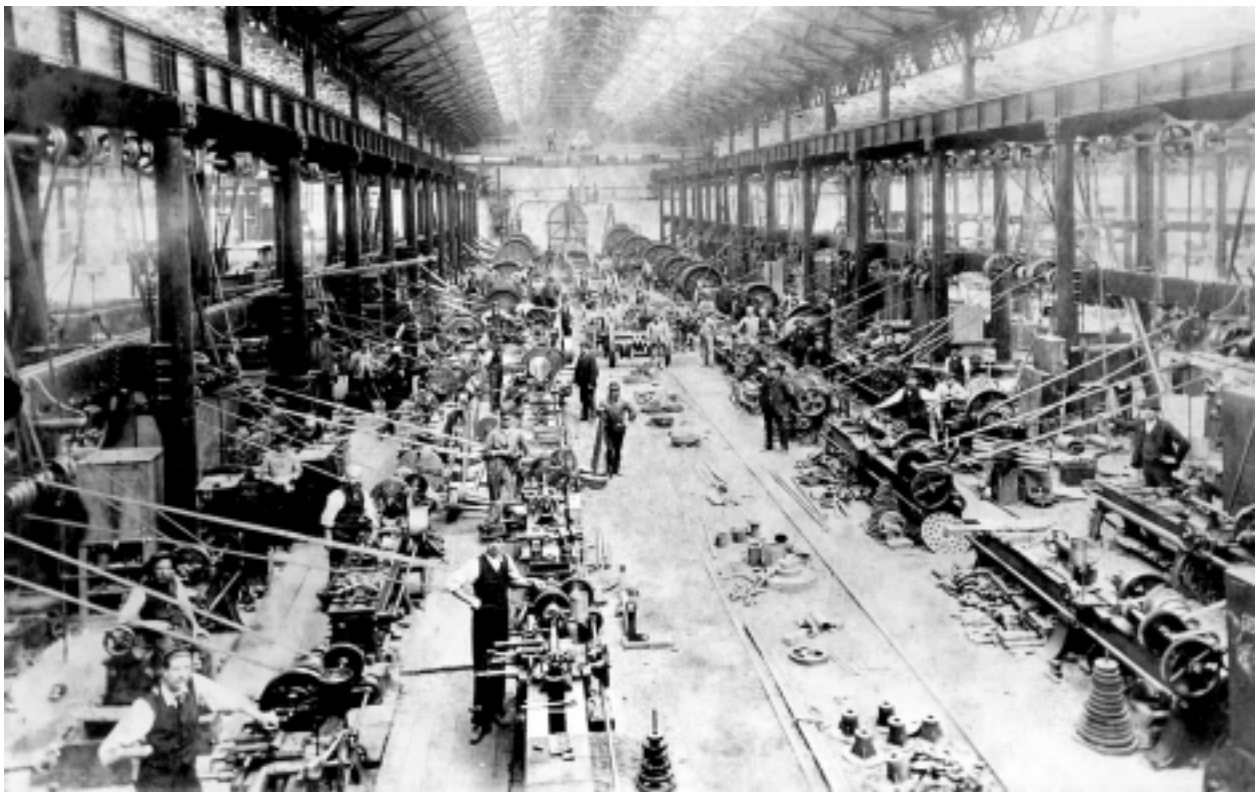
Wheel shop, Bay 9 looking south, showing wall engine on back walls l.h.s. The counter shafts are shown suspended under the column headstock with belts driving counter shafts fixed to the girders between columns. Machines were driven by belts directly off the line shaft or off the counter shafts. Note the wheels on the centre road and the overhead travelling crane. Source SRAO ELW 601/19.
